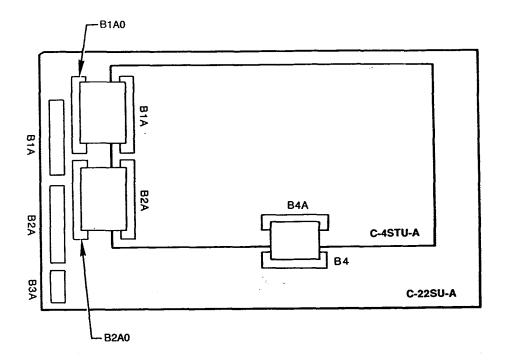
MOUNTING A C-4STU-B ON A C-22SU-A PCB
